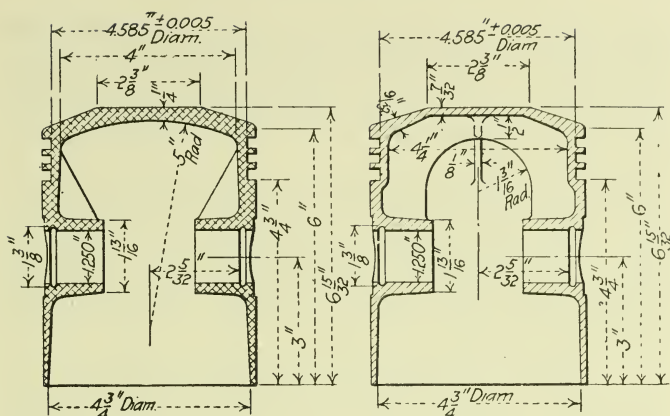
DETAILS OF THE TWO PISTONS TESTED
